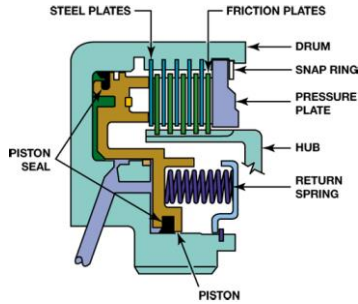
A multiple-disc clutch can hold, or drive a member of a gear set.
